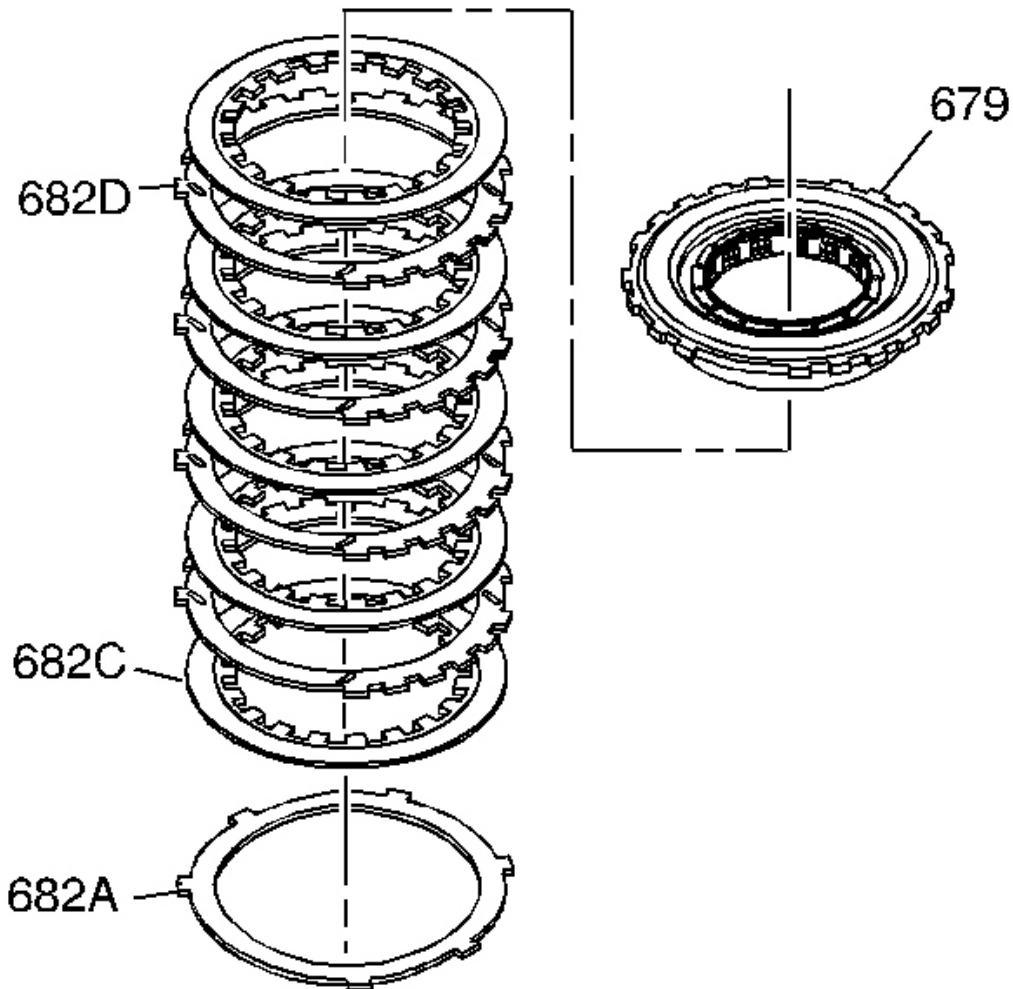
View Of Low And Reverse Clutch Plate Assembly
